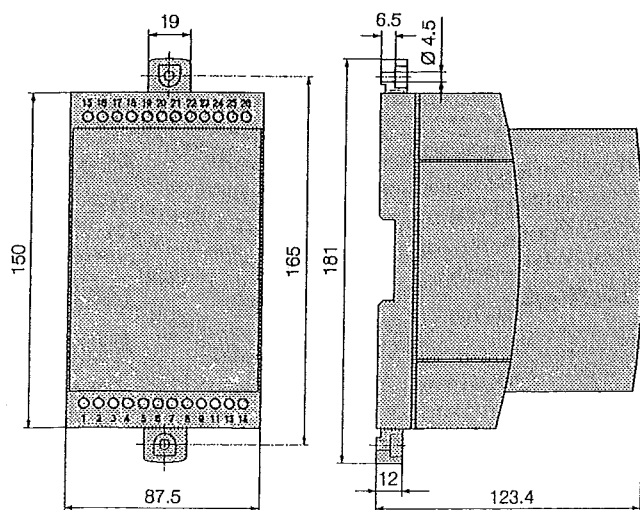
SINEAX DME in housing T24 screw hole mounting brackets pulled out.
